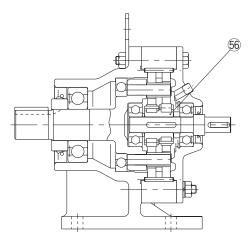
Type CNH (Horizontal, Reducer), Single Reduction (Example: Frame size 6105)
